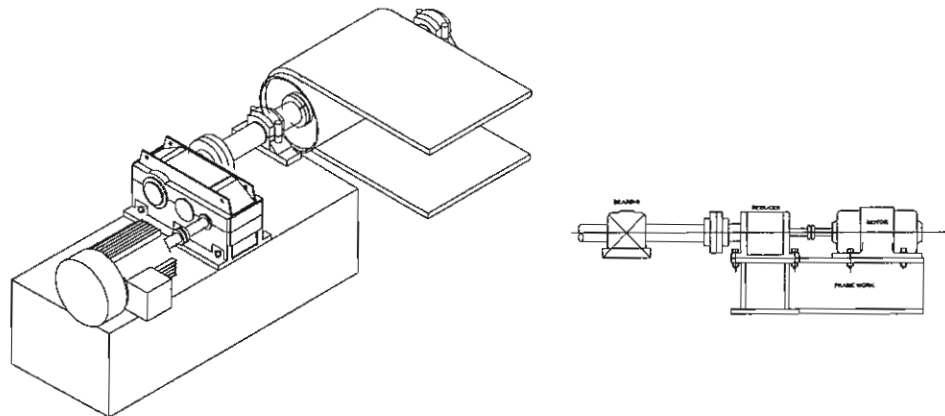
Representation of a typical parallel, fixed-base reducer flexibly coupled to a pulley shaft
